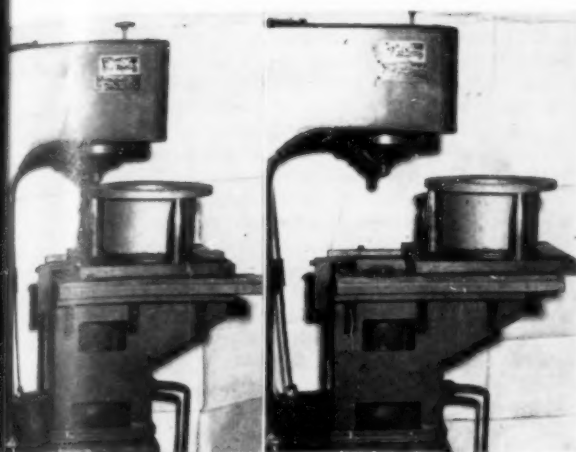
(left)—Test fixture rests on removable base and is slid out from under the penetration ball. Fig. 11 (right)—Showing adjustable stop to control location of fixture under the ball.
